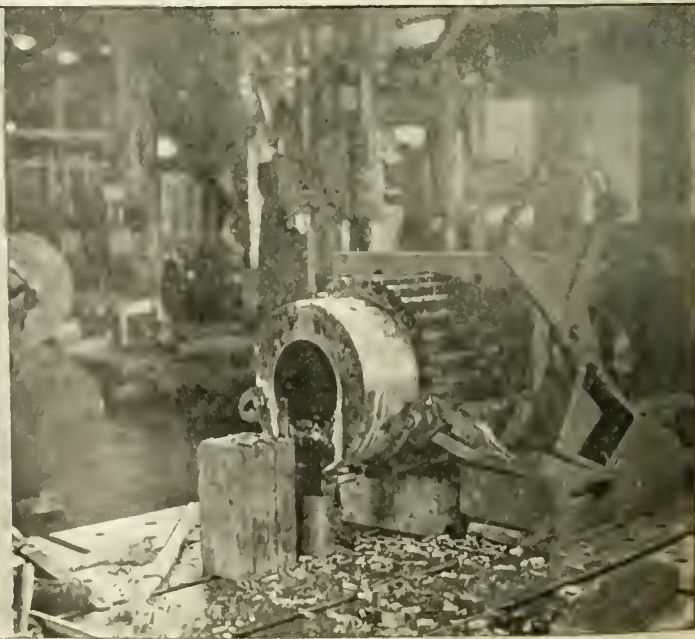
HEAVY PINION ON PLANER FOR CUTTING KEY-WAY
